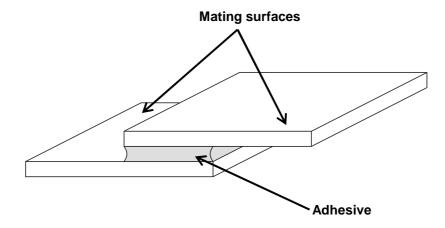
Lap joint in adhesive bonding for two workpieces.
